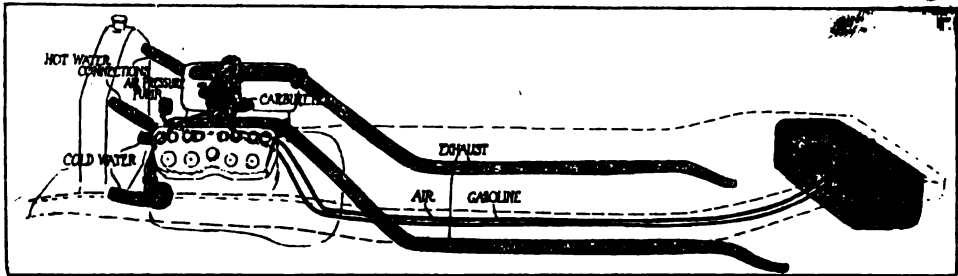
Diagram showing the general arrangement of the fuel, water and exhaust systems of the Cadillac chassis. There are two exhausts and two mufflers, one for each set of cylinders; while the gasoline is fed by pressure to the carburetor which is between the two cylinder blocks. The air pressure pump for forcing the fuel is at the front of the engine. There are two water pumps and two sets of water connections to the radiator.
